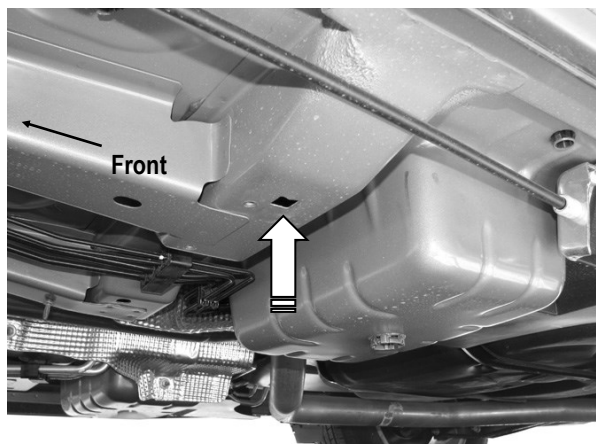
Driver Front Mounting Bracket (DFM) Installation
